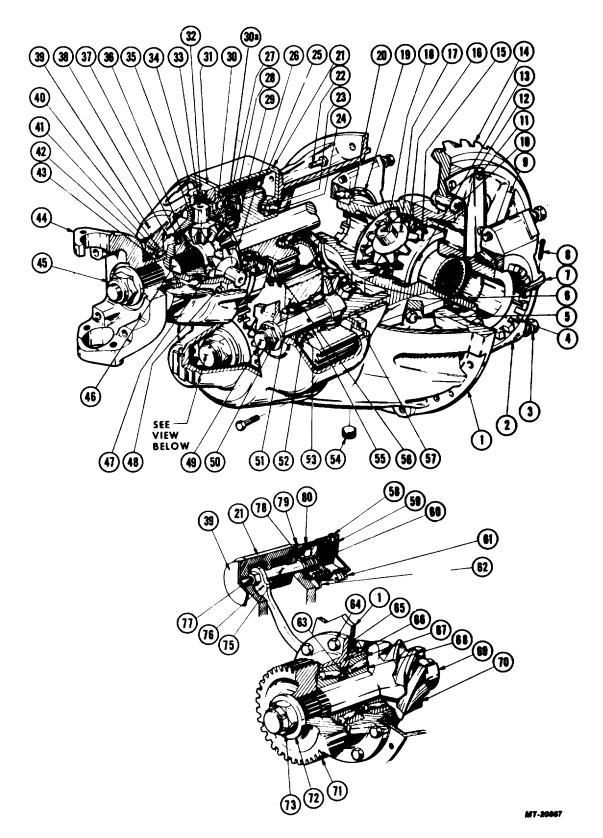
Differential Carrier Assembly - Forward Axle (Cut-away View)
